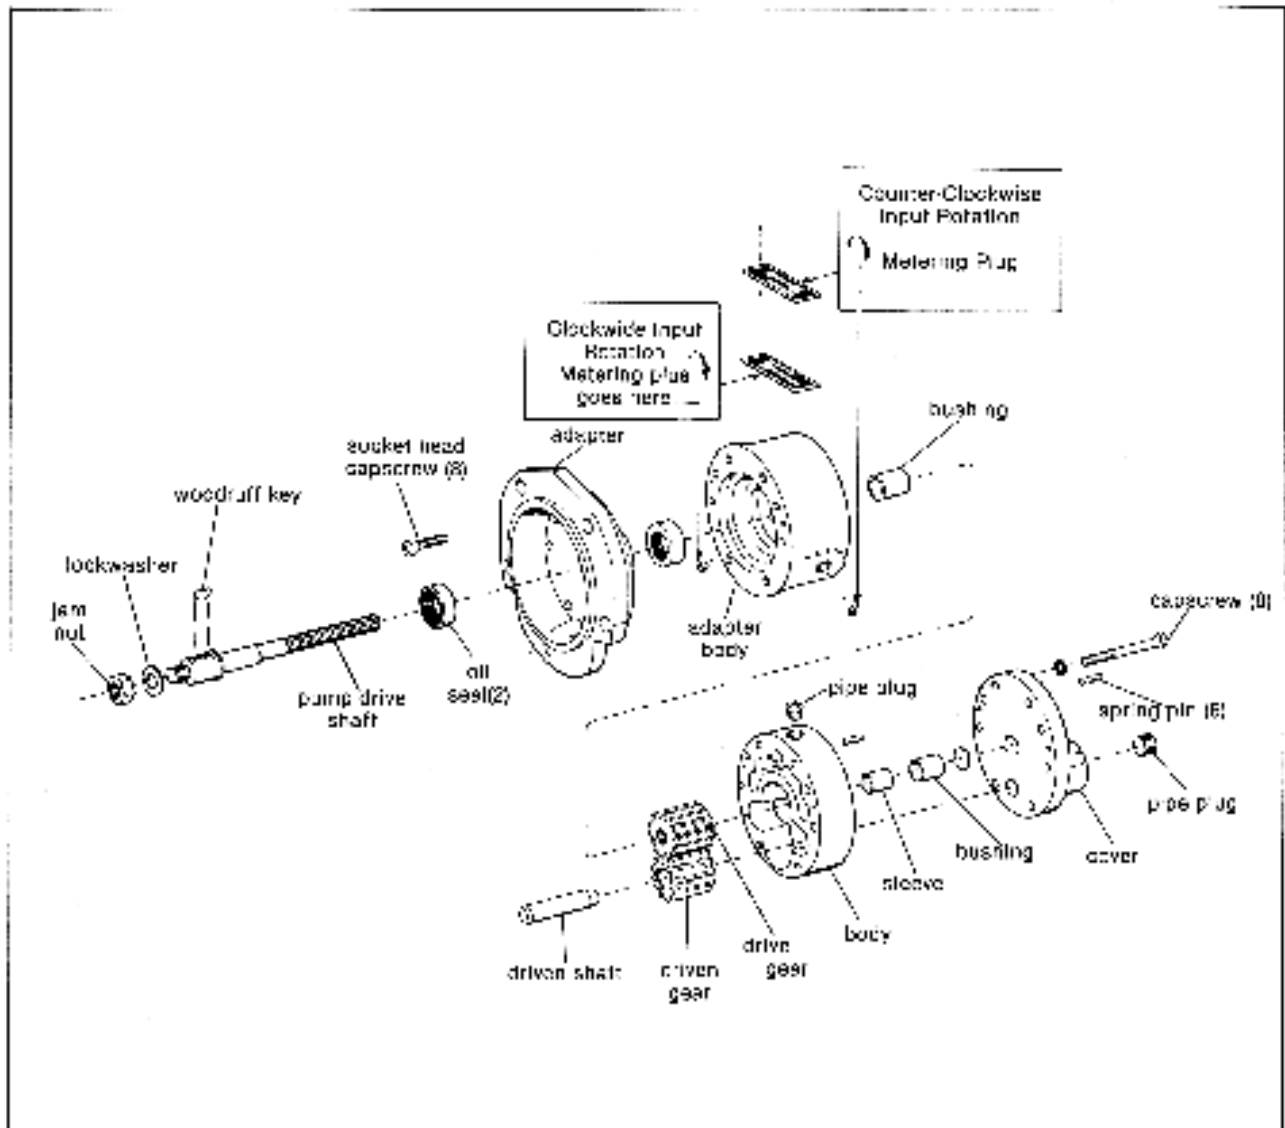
Oil Pump; Single Direct Mount Style Shown.
